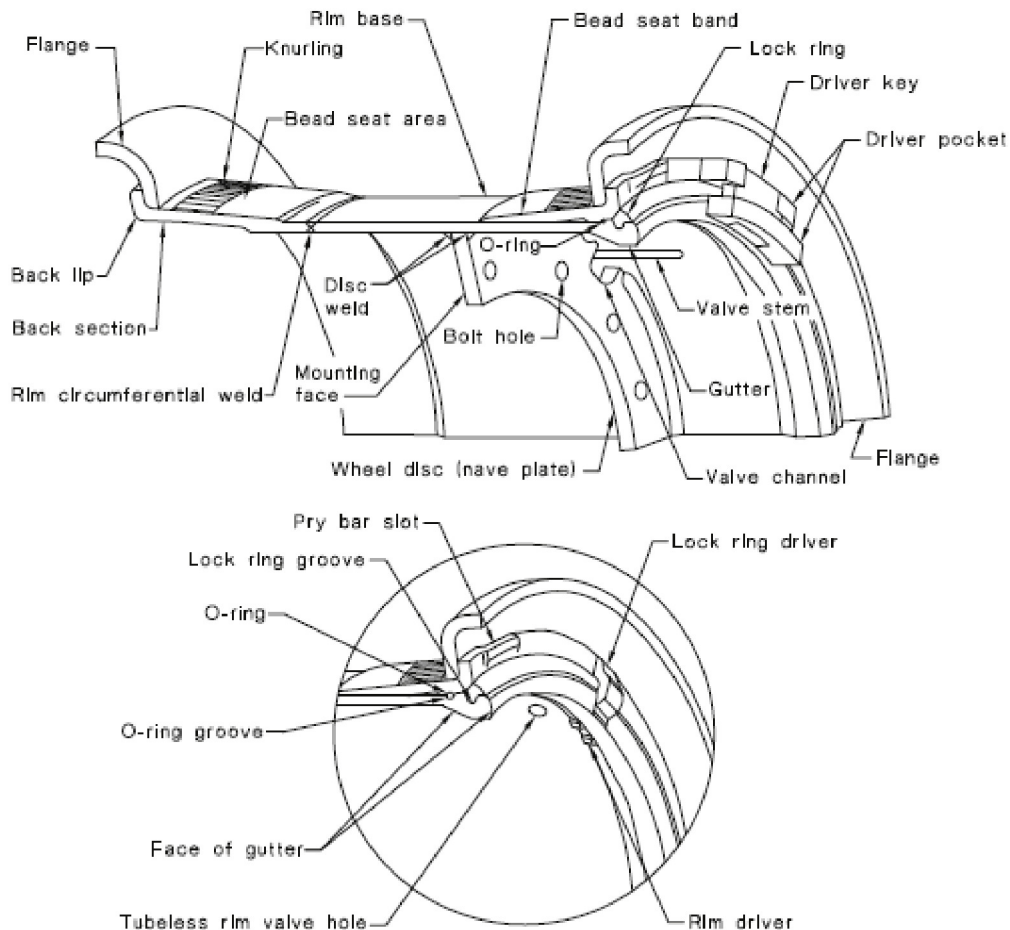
Typical Heavy Equipment Wheel/Rim Nomenclature (Source: AS 4457.1)
